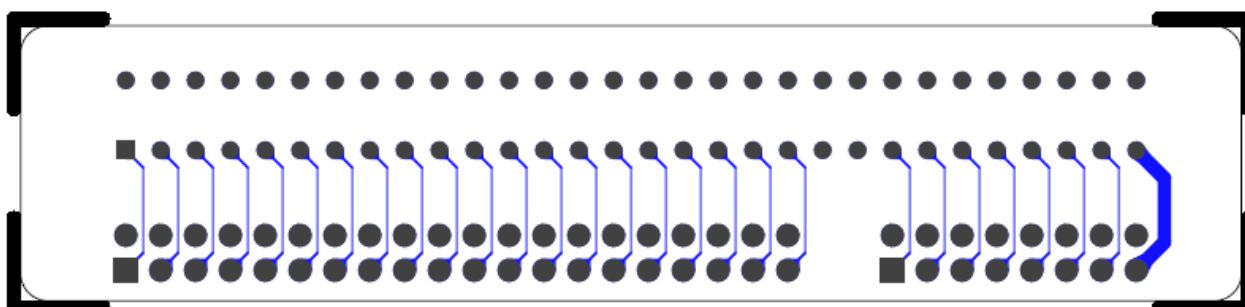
CPU-Electrode relay board: Component Side Pattern
